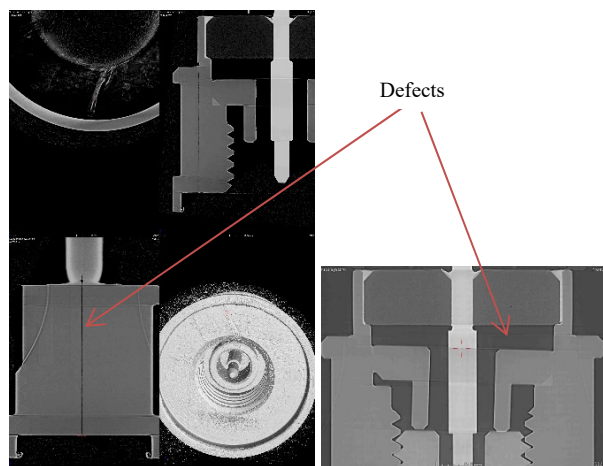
Tomographies of BPM buttons. Presence of a “straw”-like defect crossing the whole button (left picture) and wrong mechanical assembly (right picture). Courtesy: P. Tafforeau (BM05/ID19 – ESRF).
